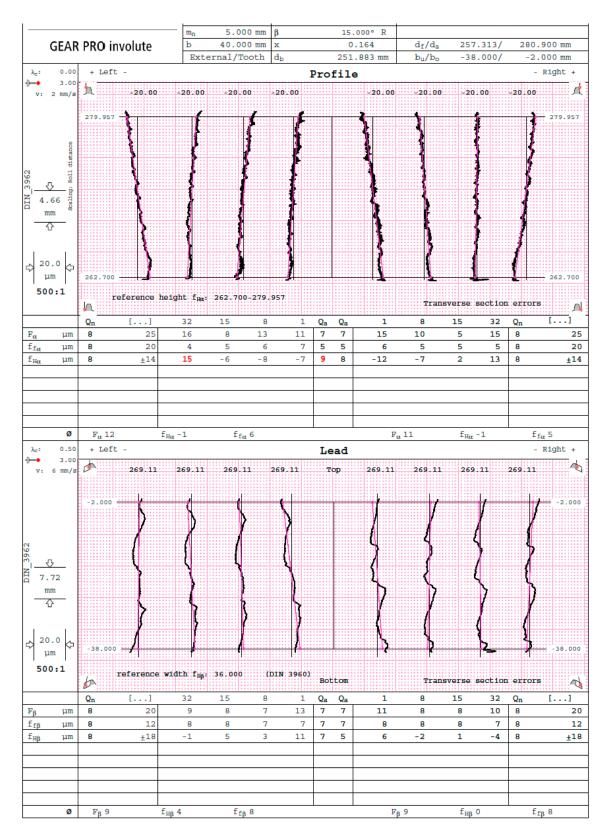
Measurement plot of one manufactured hard gear, with inserts of type 1010.
